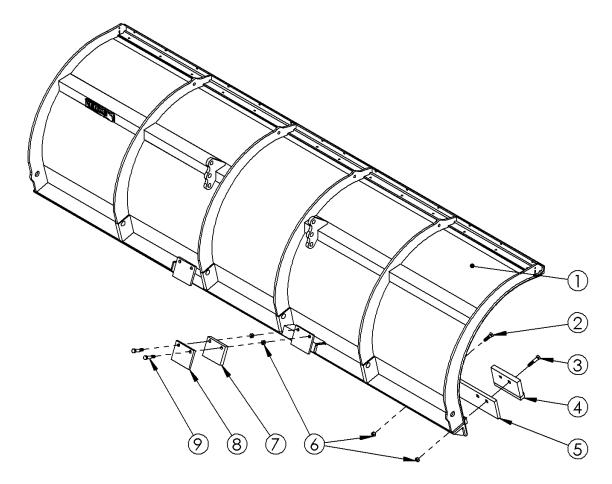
Moldboard and Cutting Edge Assembly
